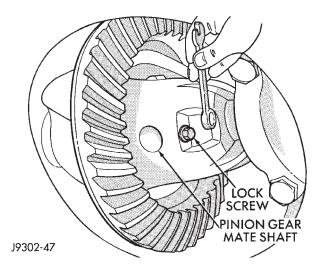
Pinion Gear Mate Shaft Lock Screw
